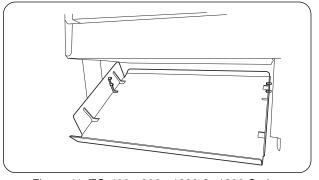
TQ-400, -800, -1200 & -1800 Series Rear Discharge
